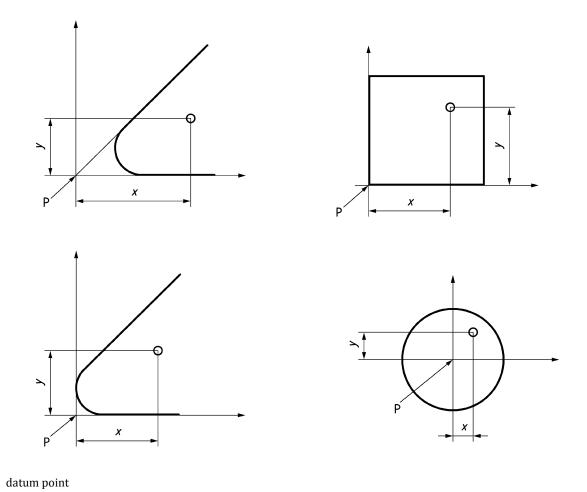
Examples of the positioning of holes relative to the datum point
